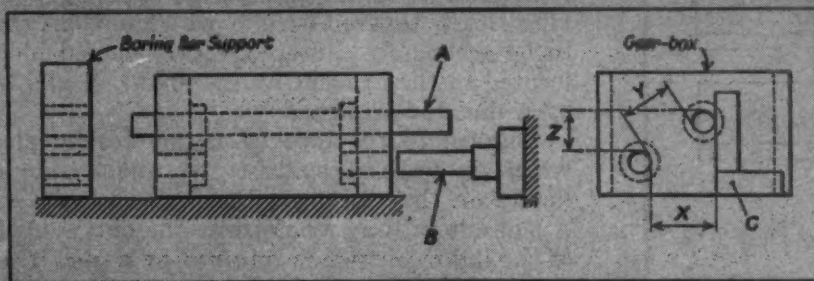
(Above) Diagrams illustrating method of using test bars to assure accuracy in drilling shaft holes in gear box
